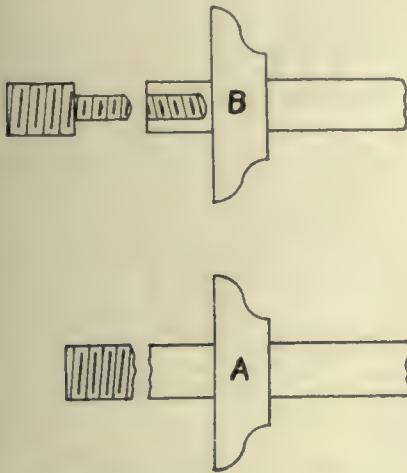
shows the jig used to bore the holes in the cast steel clutch bush B. A. is a cast iron piece with a hole bored in it to receive the clutch bush B. The boss on the back is turned to fit a recess in the face plate, care being taken to have the center of boss the same distance from center of hole as
